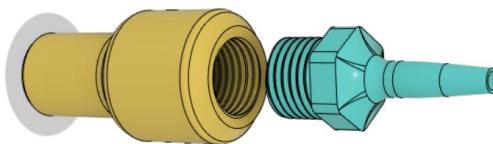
Before screwing the Oxy Nozzle Body with the Oxy Nozzle Holder
